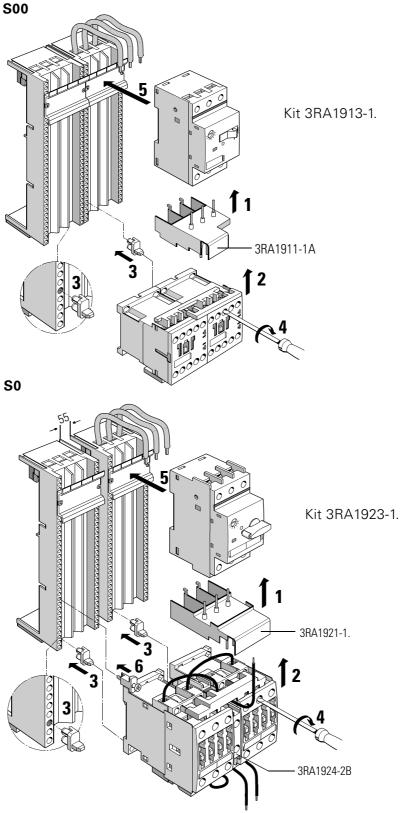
Self-assembly, busbars, reversing operation (frame sizes S00 and S0)
